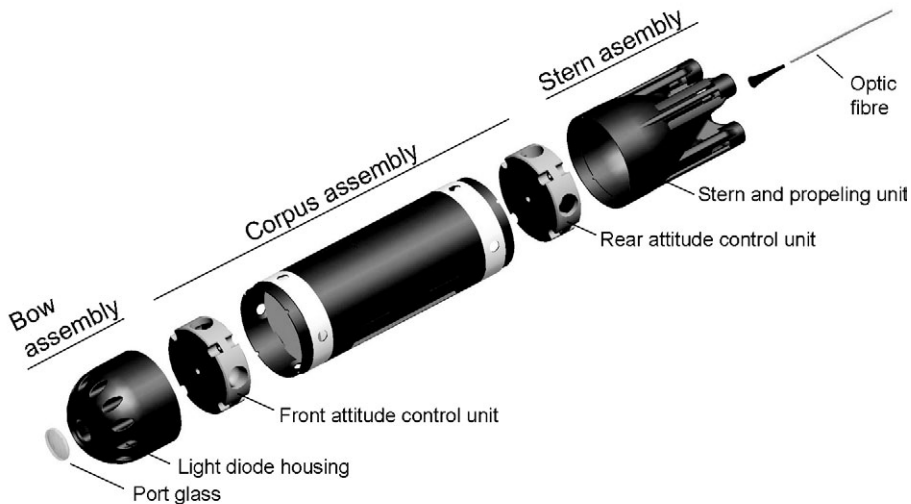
Exploded view of the DADU submersible, divided into three main sections: the bow, corpus, and stern assembly.
